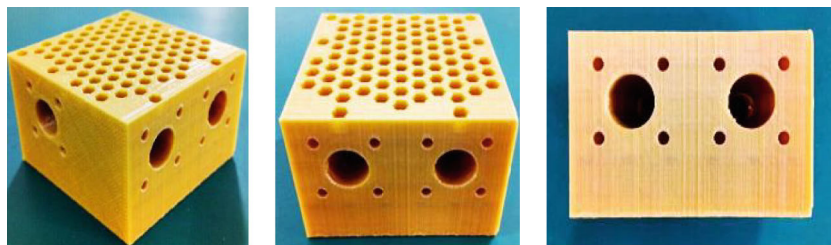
Display of all aspects of the finished hydraulic valve block.
